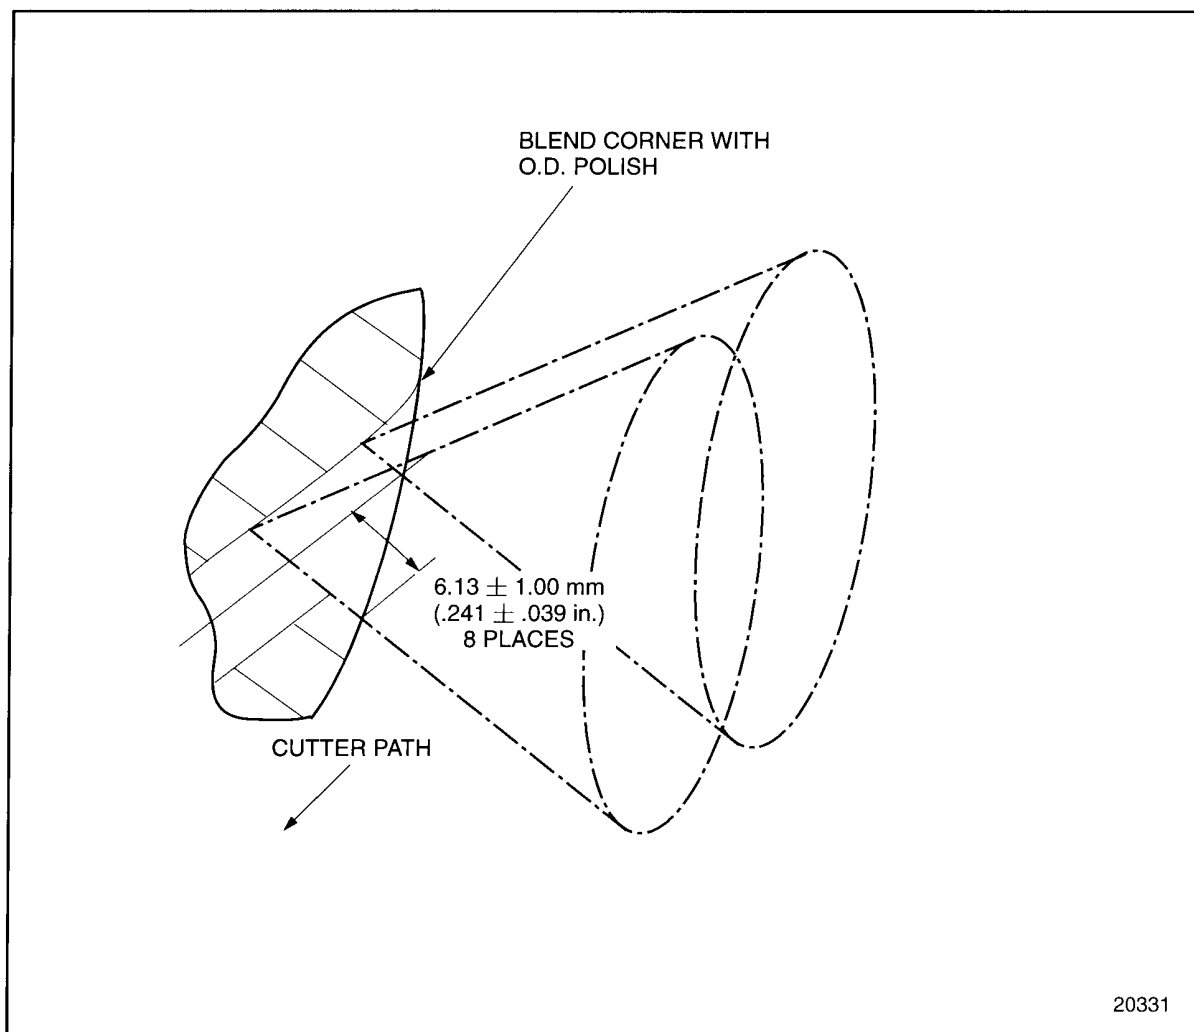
Connecting Rod Journal Oil Hole Chamfer Limits
